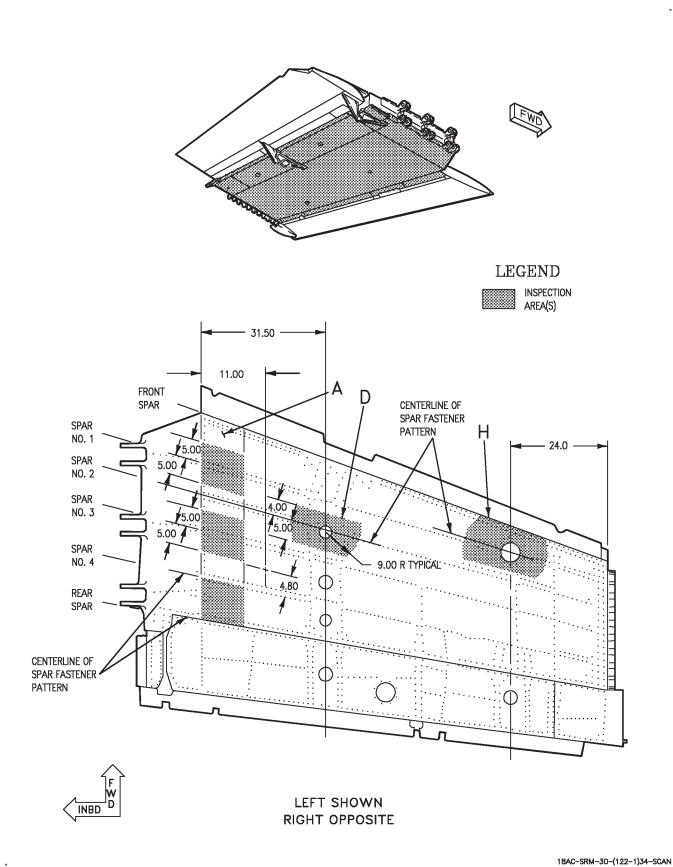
Inner Wing Lower Surface Titanium Splice Fitting Inspection Areas (Sheet 1)
